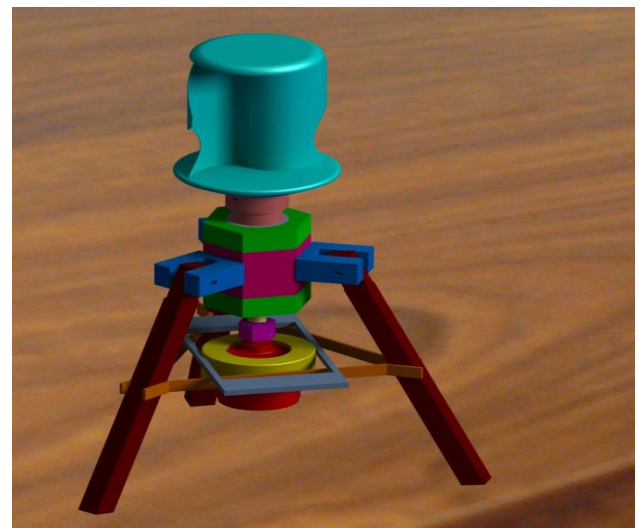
Assembly of Foldable and Portable Wind Mill
